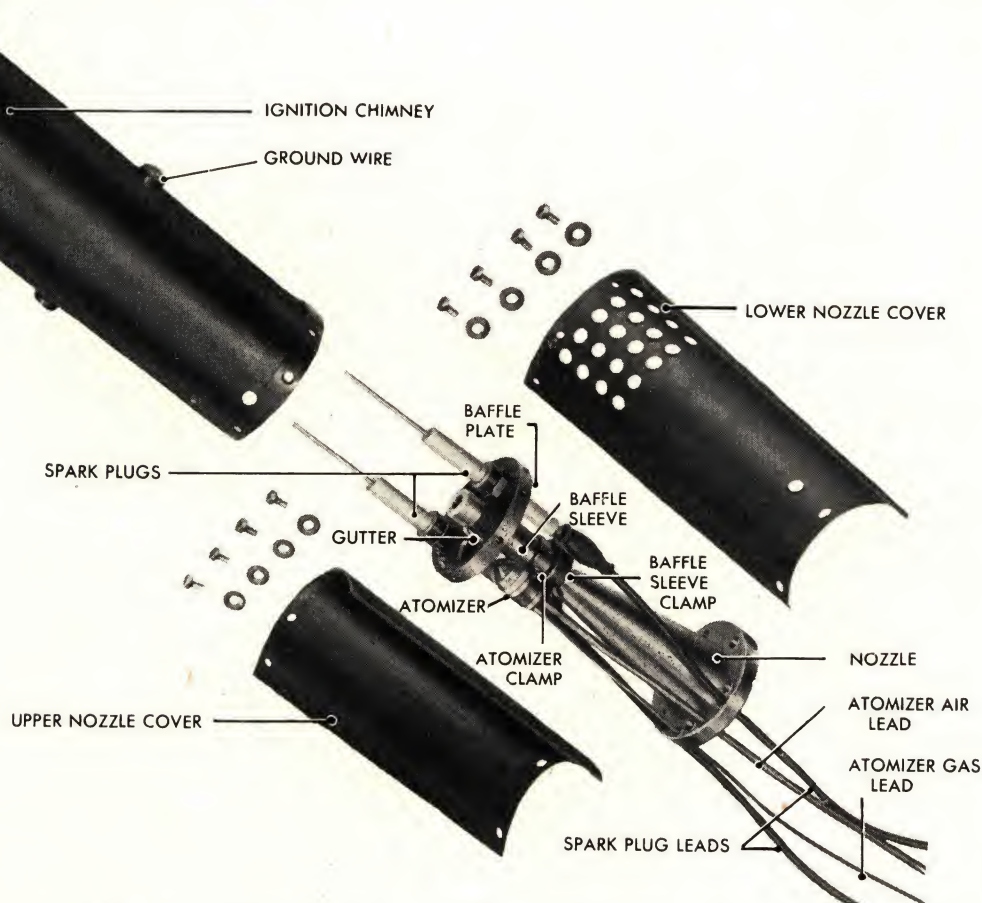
Flame Thrower Mk 1—Gun Ignition Chimney Assembly
